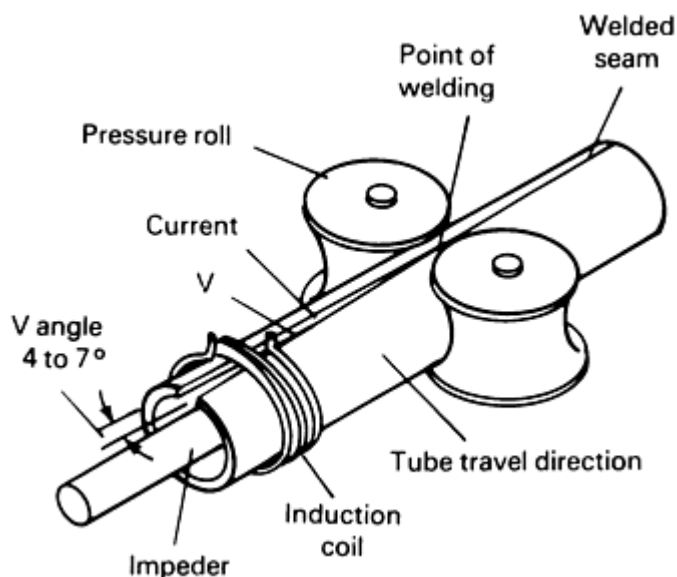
JOINING A TUBE SEAM BY HIGH-FREQUENCY INDUCTION WELDING
